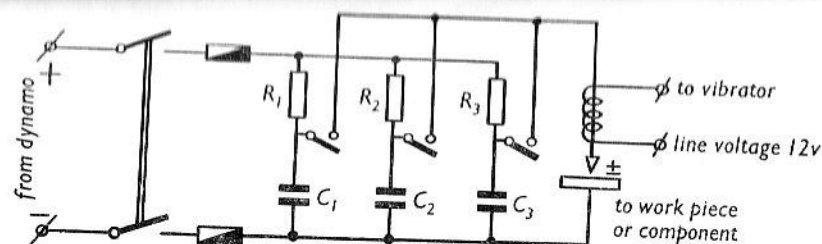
Electrical arrangement for machine of the Metalloshtampartel
